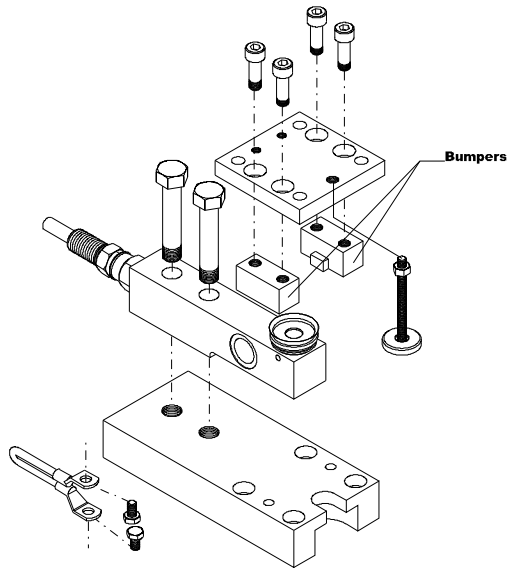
EXPLODED ISO VIEW OF BUMPER LOAD POINT ASSEMBLY
